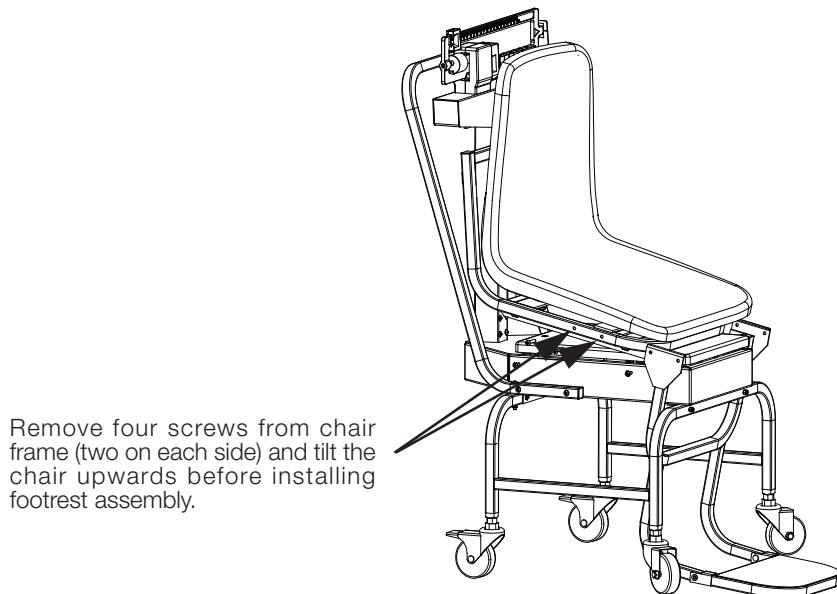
Tilt the Chair Upward Before Installing the Footrest Assembly
